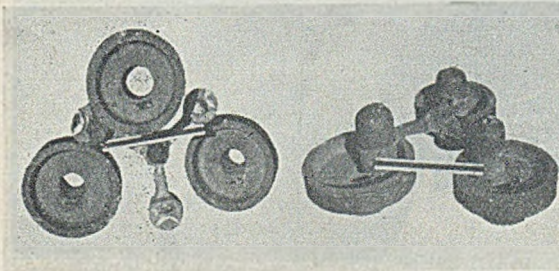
Typical Castings incorporating Top Runners leading into Knock-off Heads.
